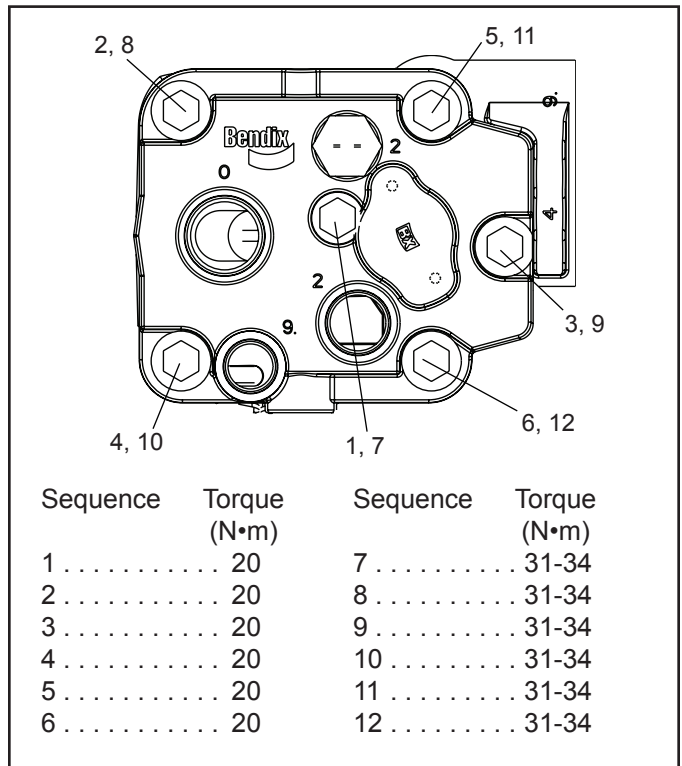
Closed Room Compressor Head Bolt Torque Sequence
